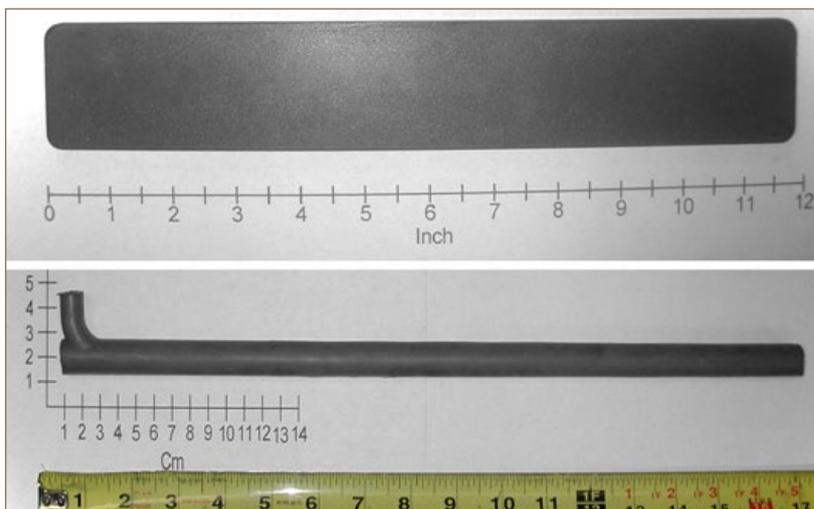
As-moulded PIM tube and blade showing MPI's capability to produce long parts
